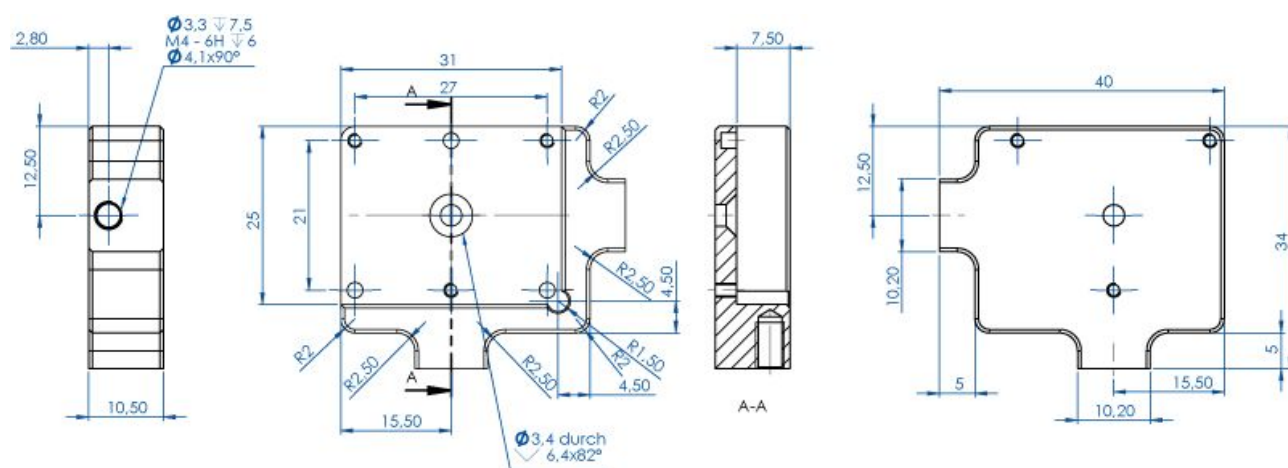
Display mount dimensions for ceramic packaging versions (unit: mm)
